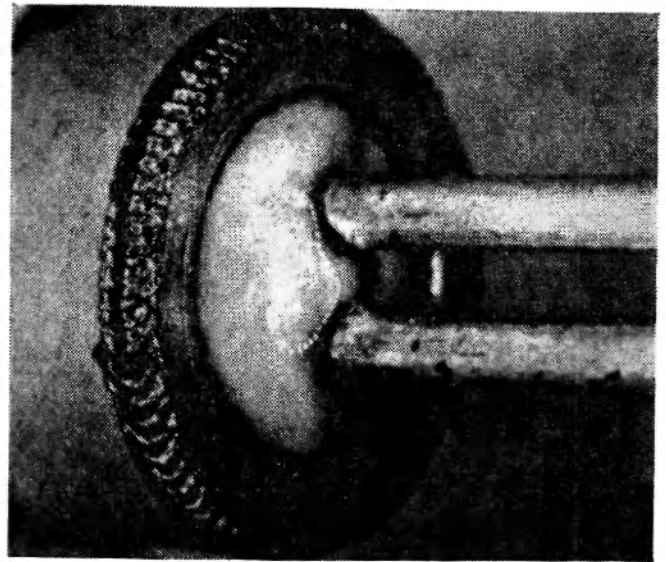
Laser weld of an electrical feedthrough in a thermistor enclosure. The ceramic is within 0.050-in. of the weld which was successfully made without heat sinks as required by gas-tungsten-arc or electron-beam welding or brazing (X25).
